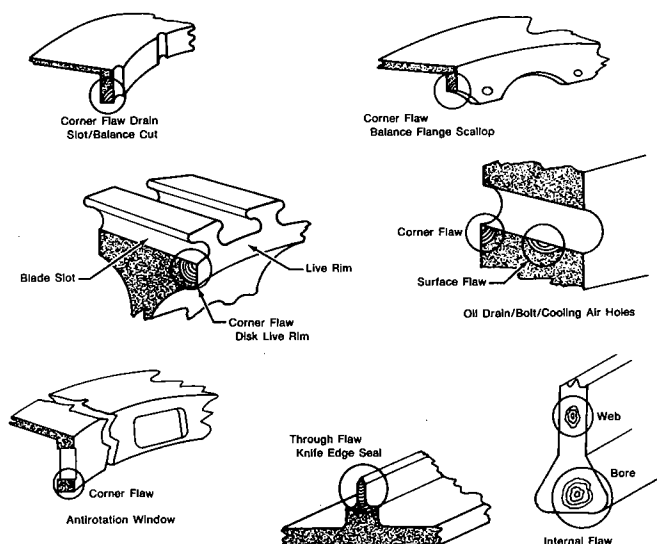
Sketch of typical gas turbine engine rotor component flaw types.
